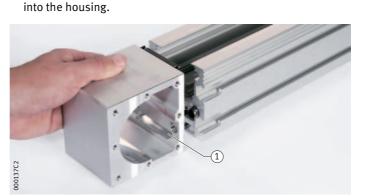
Feeding the toothed belt onto the toothed belt pulley
